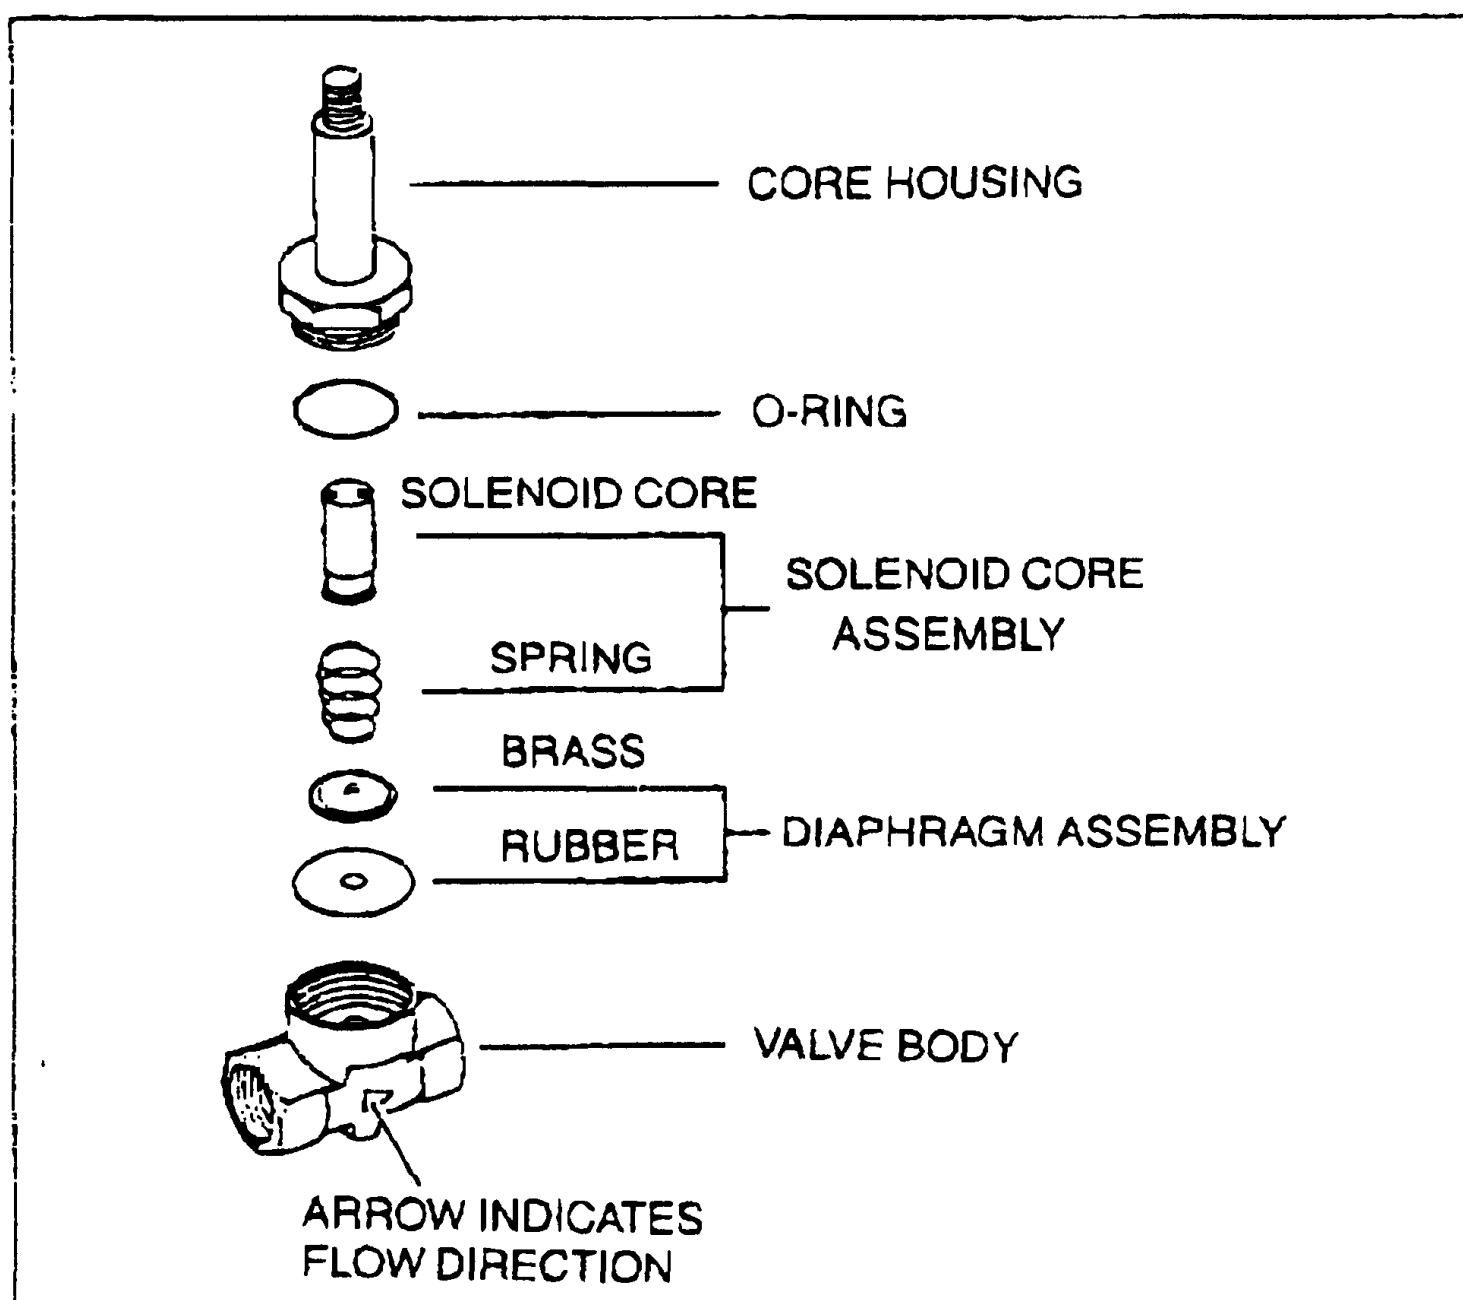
EXPLODED VIEW OF SOLENOID AND DIAPHRAGM ASSEMBLIES
